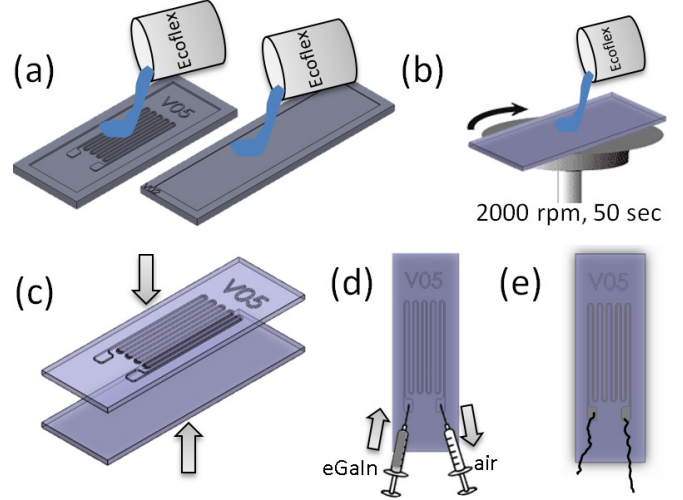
(a) Rubber is poured in molds (b) The flat layer is spin coated (c) Bond layers together (d) eGaIn injection (e) Anchor wires
